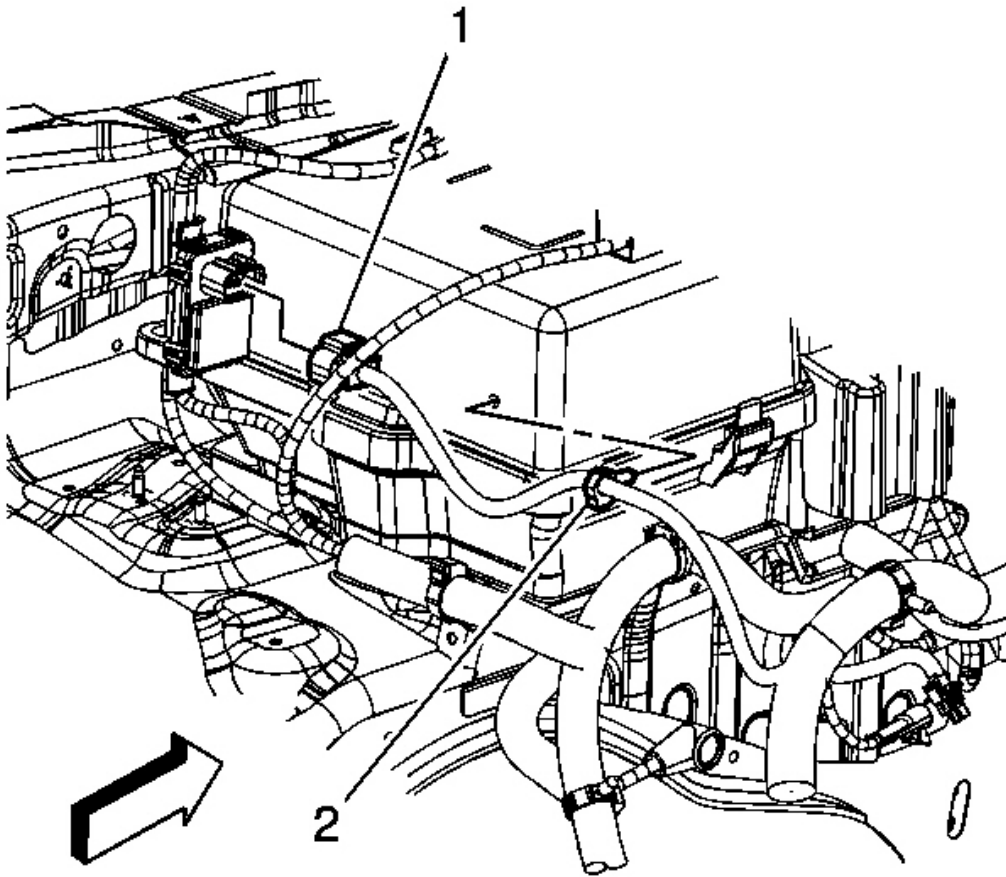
Identifying Engine Wiring Harness Connector & Retaining Clips
